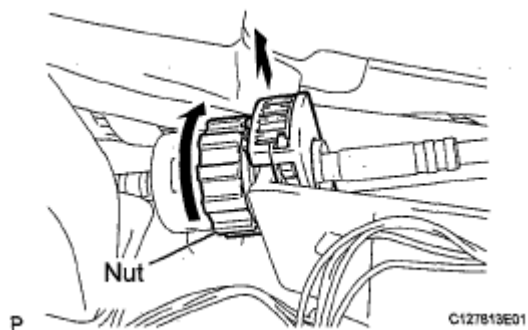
Disconnecting Control Cable Of Shift Lever Retainer
